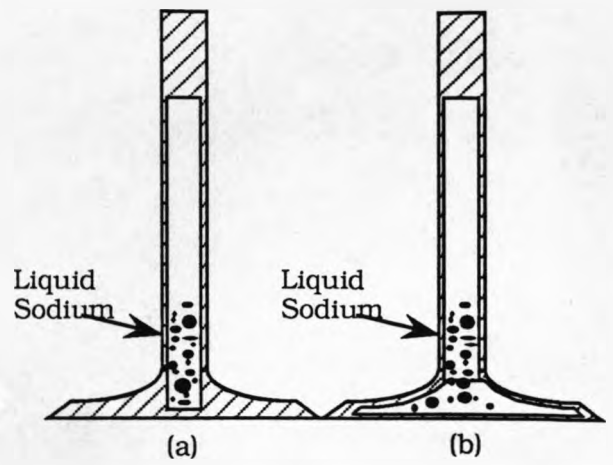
Valve modifications-using liquid sodium (a) hollow stem, (b) hollow head and stem
